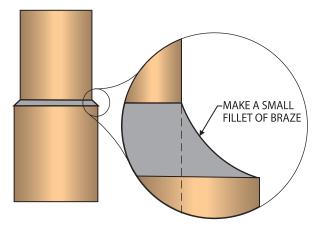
Making a smooth brazed fillet is a good way to prevent pin hole leaks.
